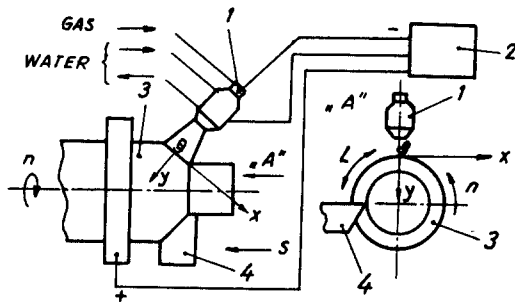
Roughing by cutting of the shell on the outside surface of the cylinder for Diesel motor (schematic diagram)
